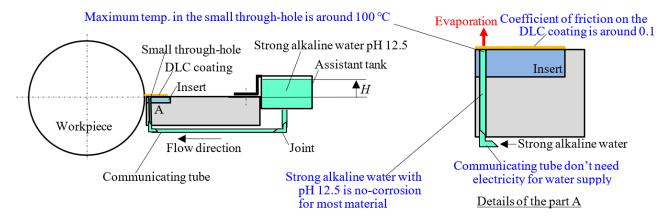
Explanation the cooling using DLC coating insert with the small hole and the communicating tube (*H*: height from tool rake surface to strong alkaline water surface. See Fig. 7 and 8.)
